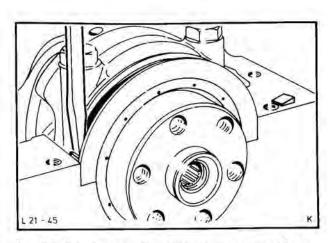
Press in rear main bearing cap inserts, using blunt screwdriver
